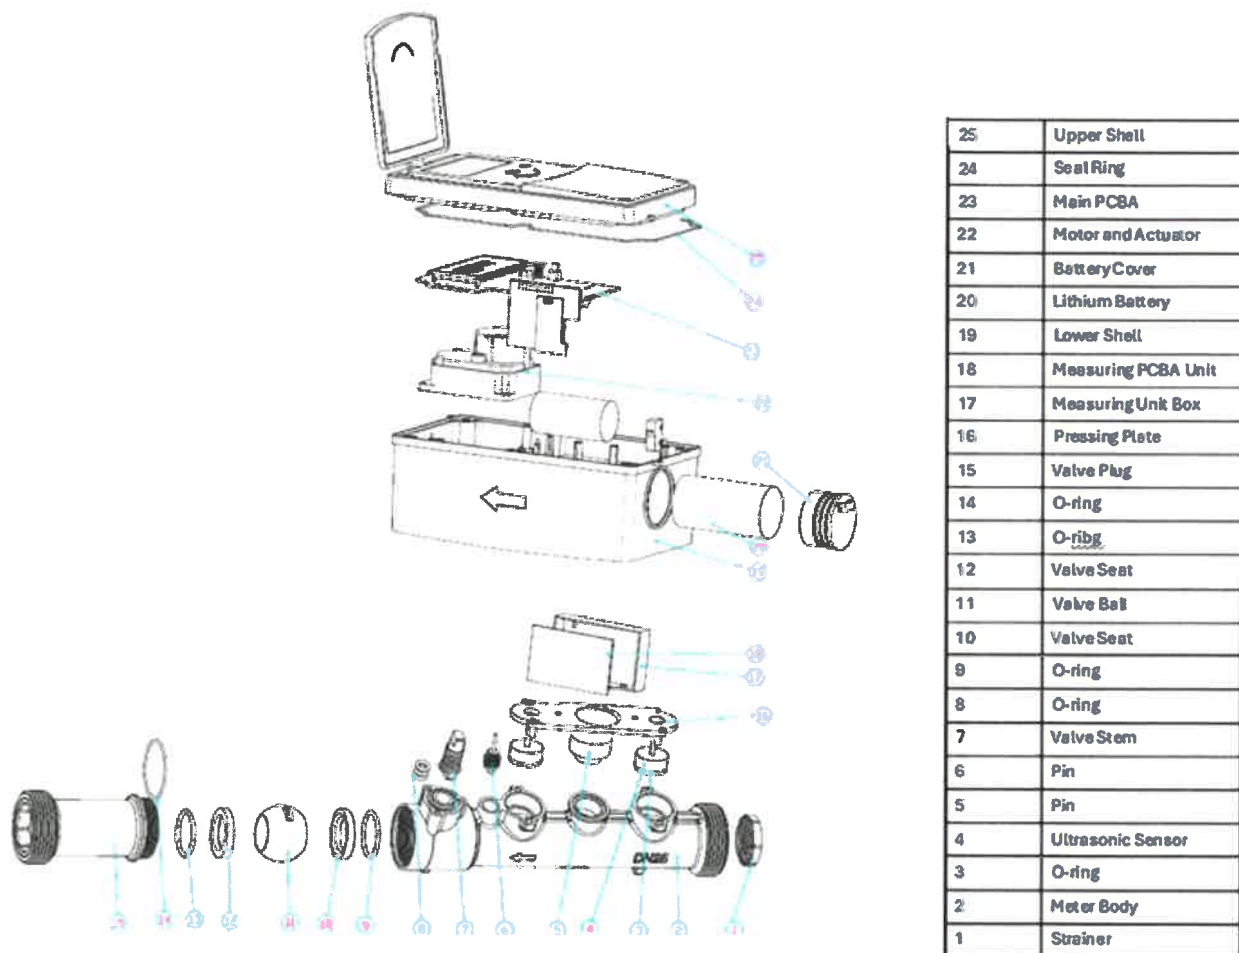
Exploded view of water meters type UWM 2401-25 and UWM 2401-40
